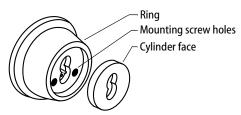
Installing the cylinder face for doublekeyed deadbolts and deadbolts with concealed screws
